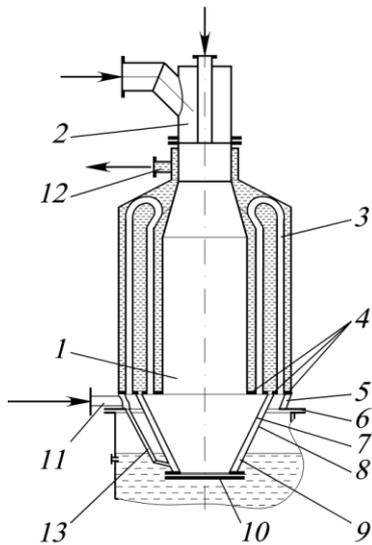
Diagram of the radiation part with increased maintainability: 1 – flame tube; 2 – burner; 3 – smoke tubes; 4 – tube sheet; 5 – ring water jacket; 6 – mounting flange of the radiation part; 7 – inner bottom of the flame tube; 8 – the outer bottom of the flame tube; 9 – water jacket; 10 – a cover; 11 – pipe for supplying return water to the heating system; 12 – branch pipe of direct heating water outlet
